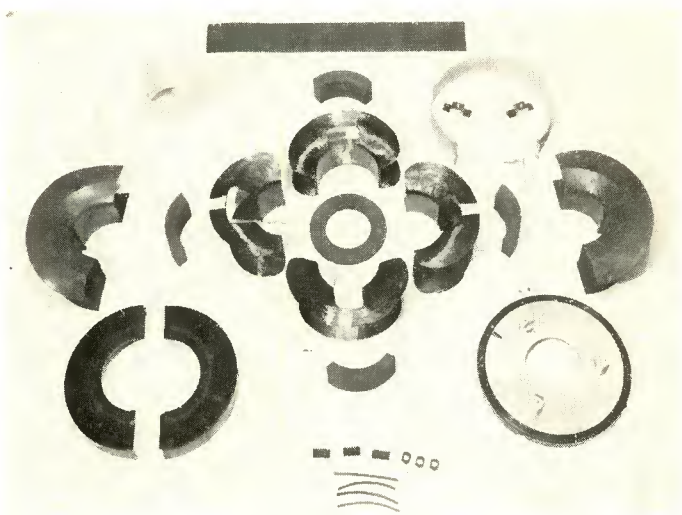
Disassembled parts of deflecting yoke 230FD1.
